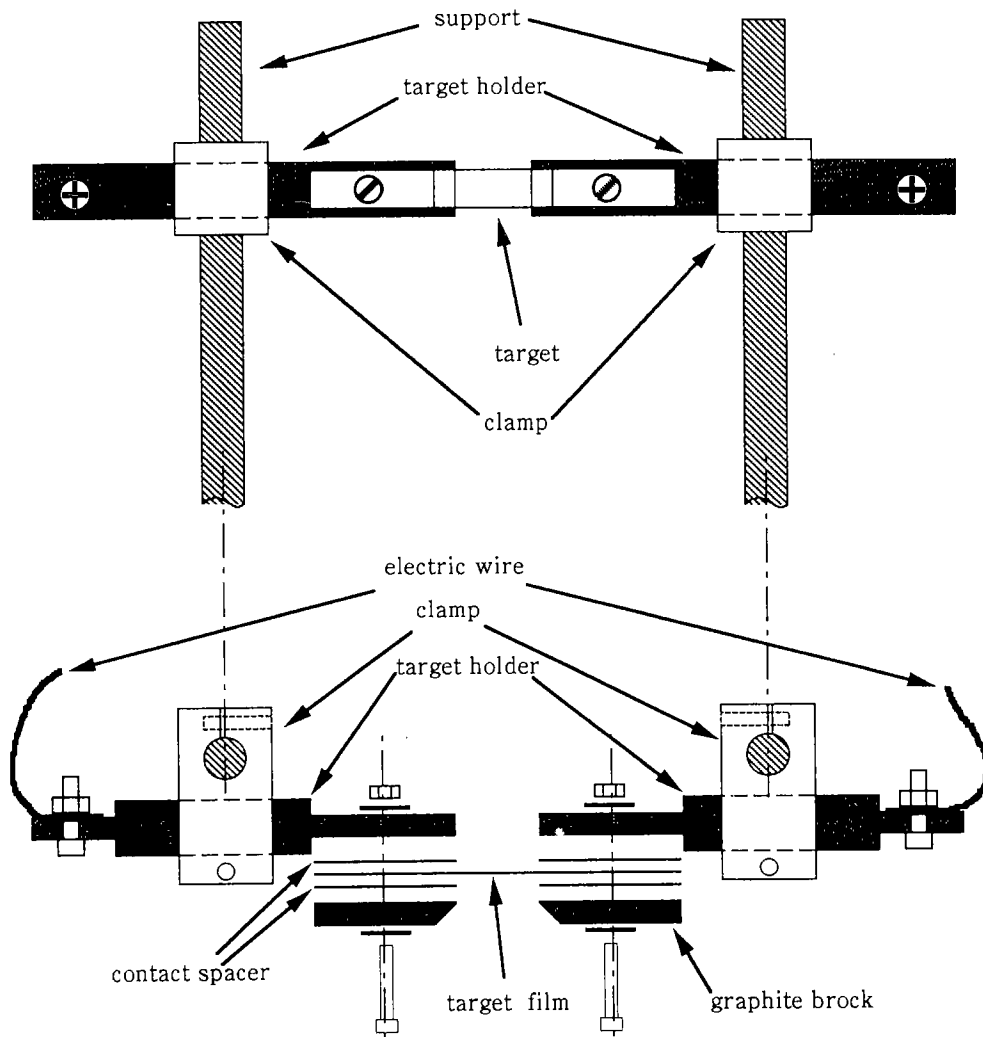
Structure for target holding. Upper : front view, lower : a birds eye view.
